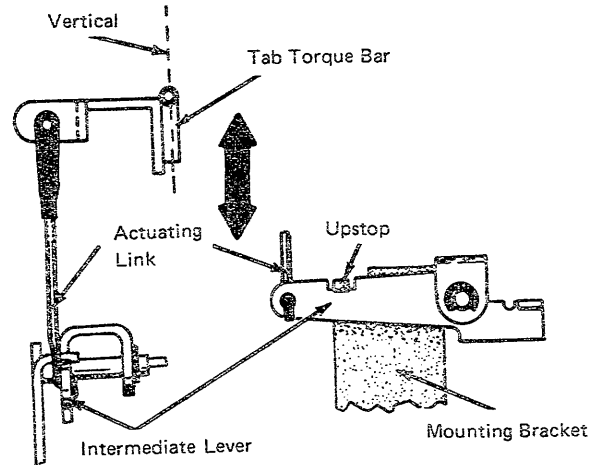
Actuating Link, 15-Inch Machine (Level 1)
